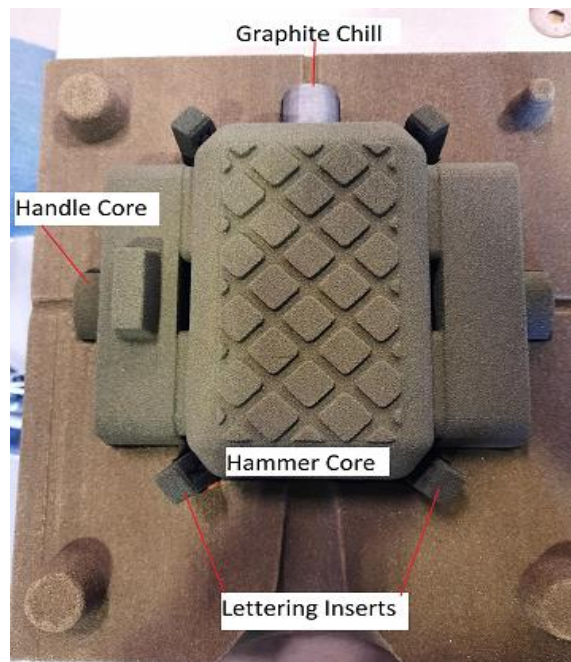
The core, lettering inserts, and chill assembled in the mold.
